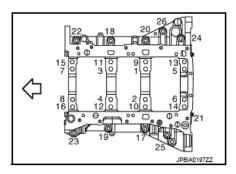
Identifying Lower Cylinder Block Bolts With Tightening Sequence Courtesy of NISSAN NORTH AMERICA, INC.
